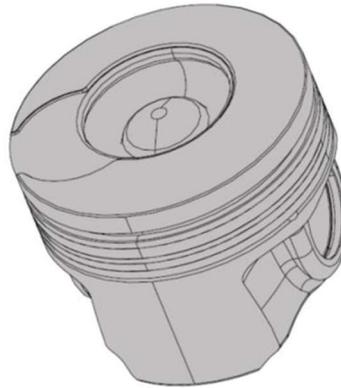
Piston Geometry - Toroidal Combustion Bowl – M&M Jeeto
